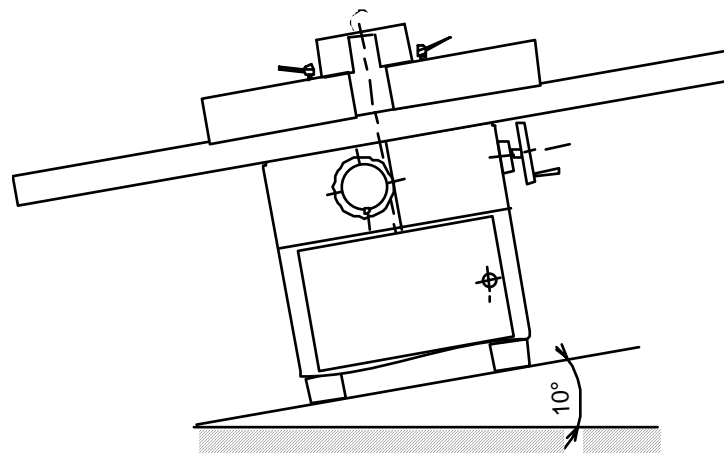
Example of testing the stability of a single spindle vertical moulding machine (front view)
